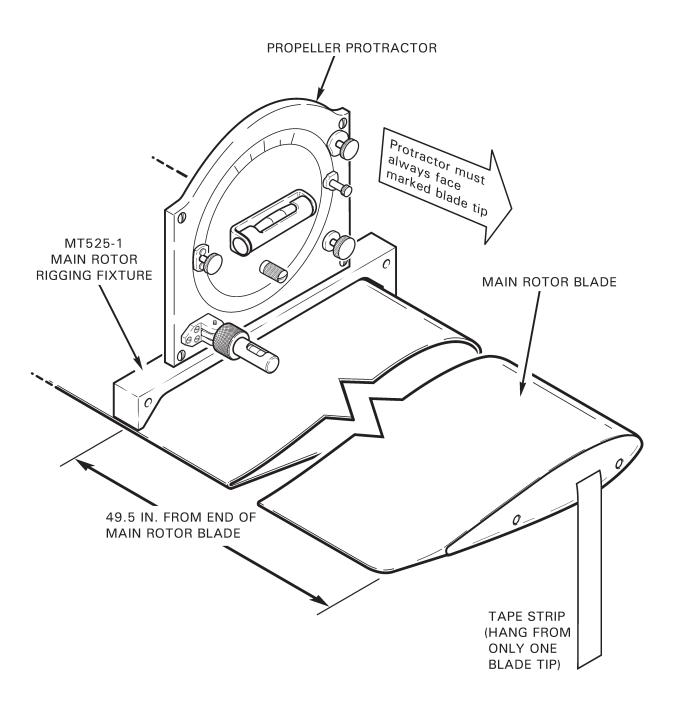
MAIN ROTOR BLADE RIGGING
